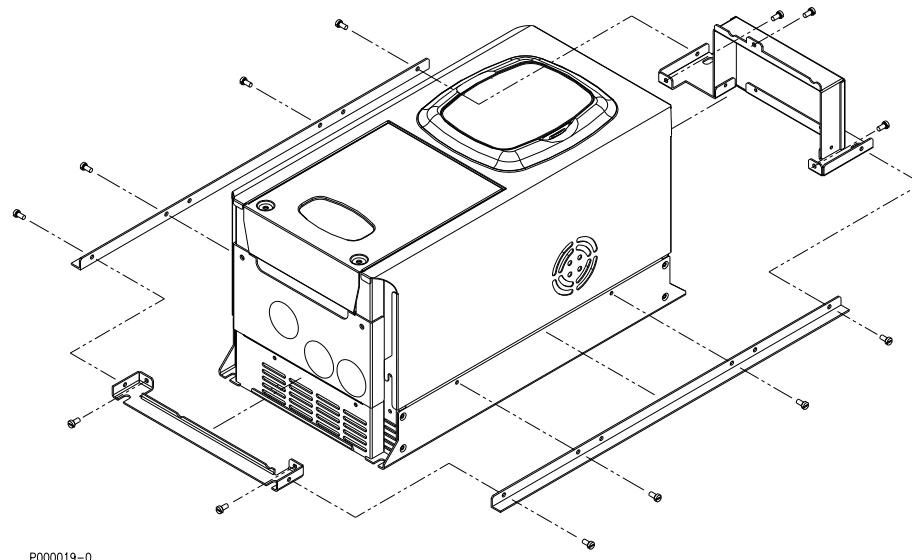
Fixing points of the mounting panel for the through-panel assembly of SINUS K S05.
